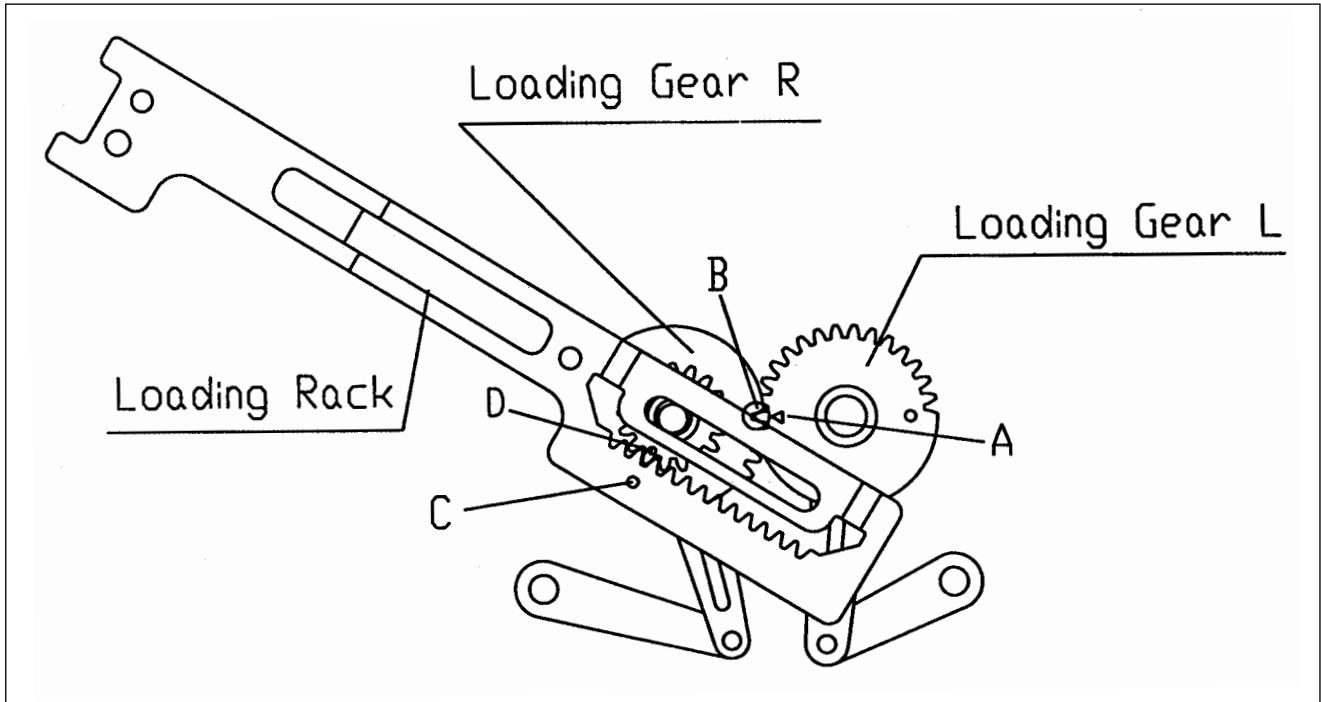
Mechanical Checks/Loading Loading Rack and Loading Gear Alignment
